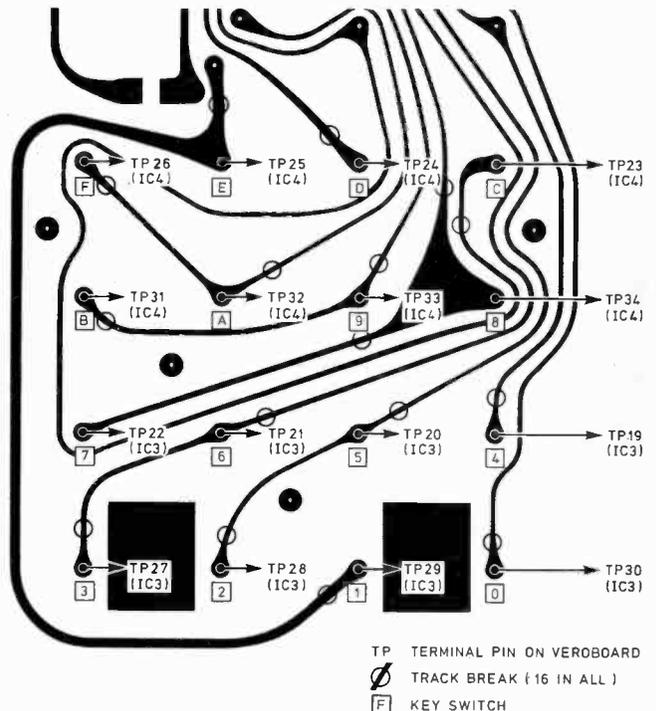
Proprietary p.c.b. inside the Sinclair Cambridge, showing the keyboard end where track cuts are necessary
